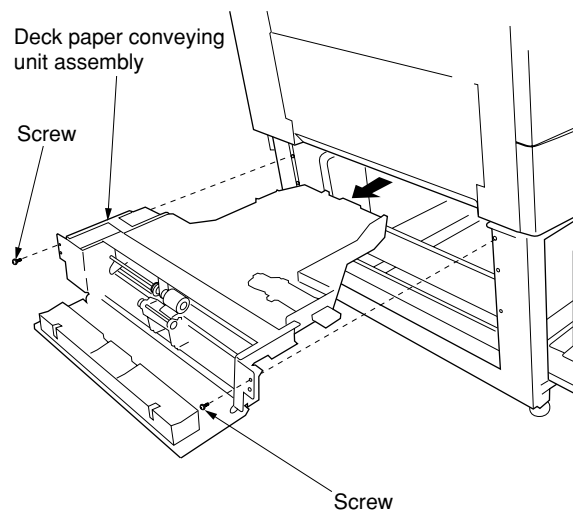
Detaching and refitting the deck paper conveying unit assembly
